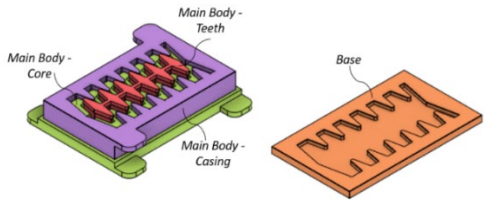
Diagram detailing the different components that make up the mold for the final segment design.
